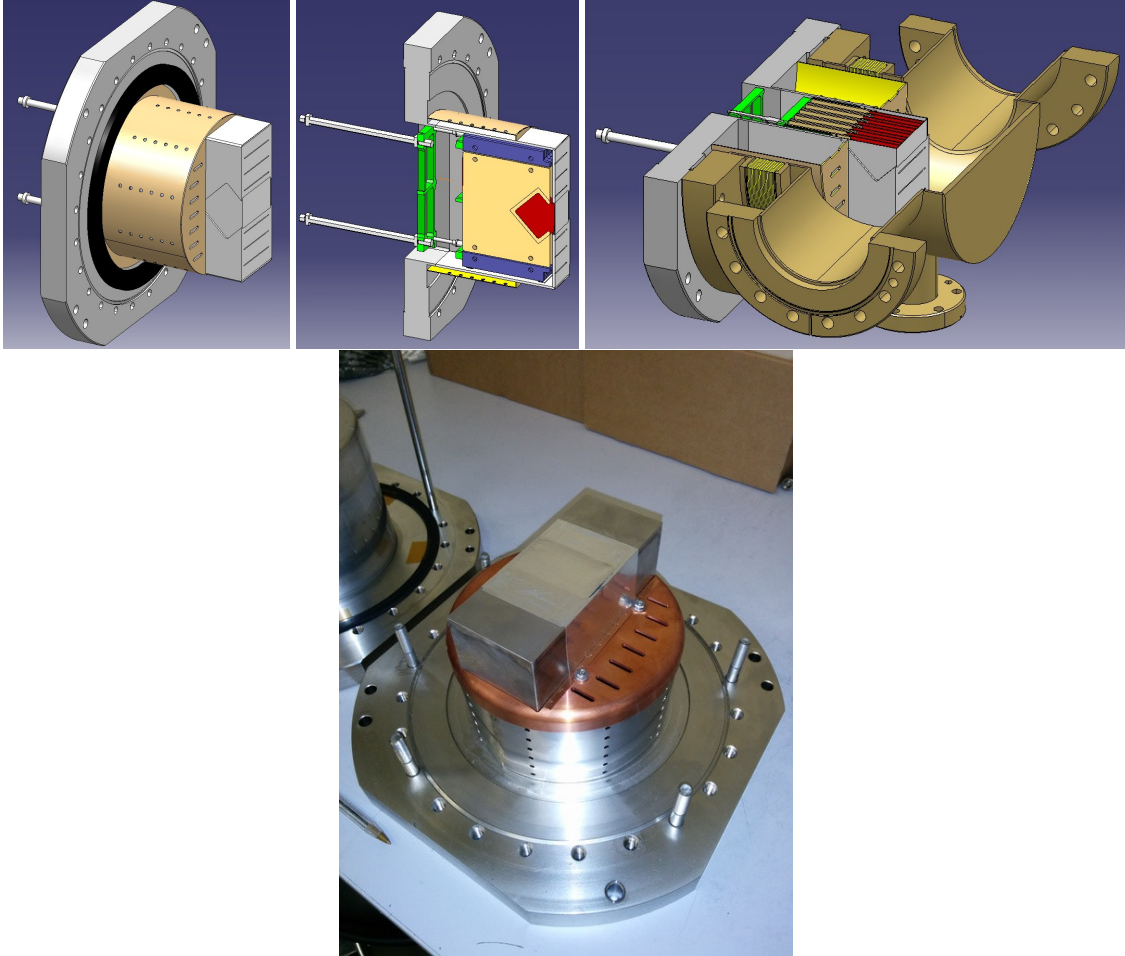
Top: Drawings of the cylindrical RF shield for the box-shaped horizontal RPs. Bottom: the manufactured shield.
